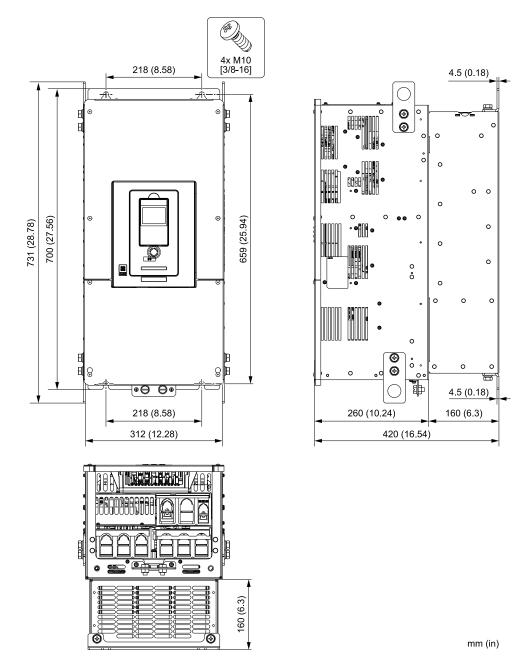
Exterior and Mounting Dimensions Diagram 1
